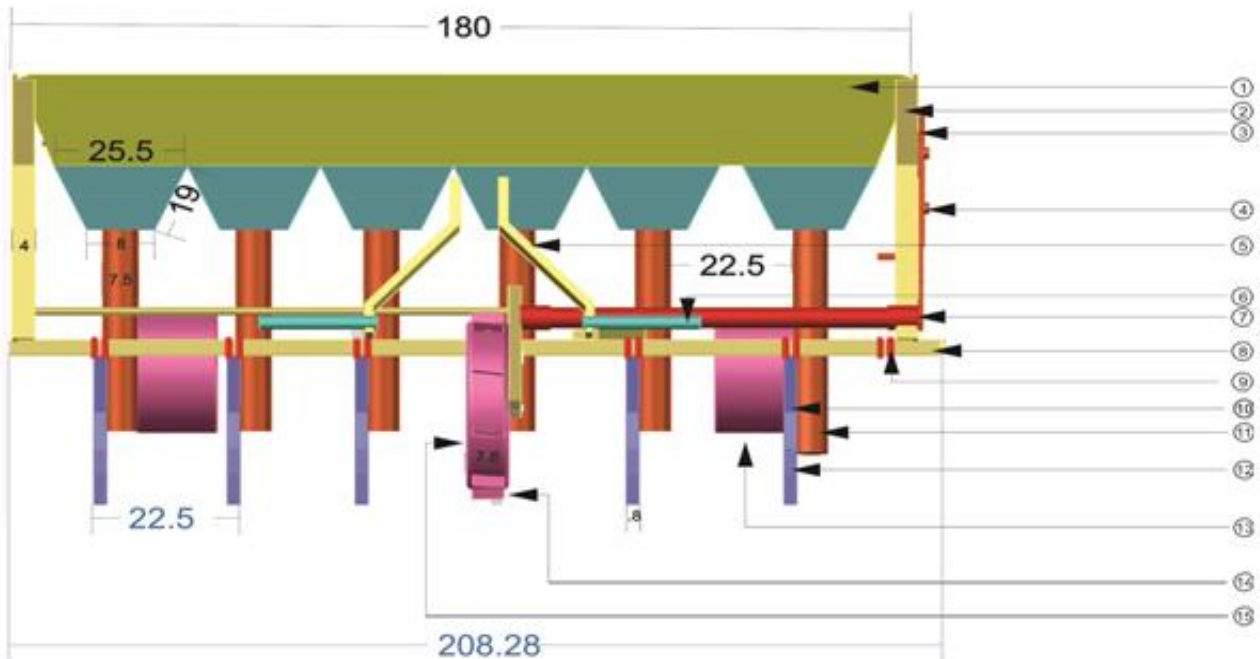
Front view of developed Prototype of Subsurface Manure and Seed Applicator
